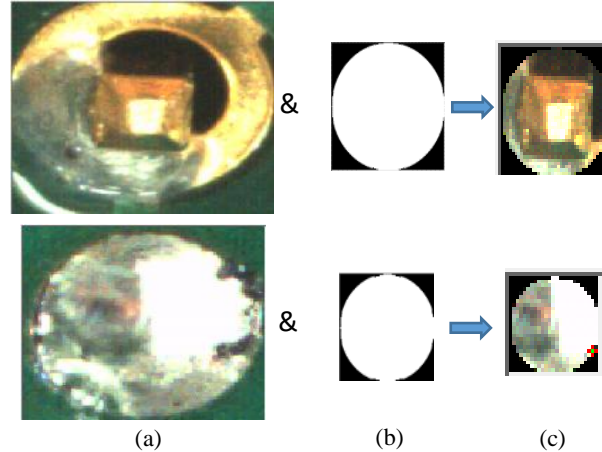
Image size reduction for solder void detection inside drill-hole. (a) Solder joint. (b) Binary masking image. (c) ROI
